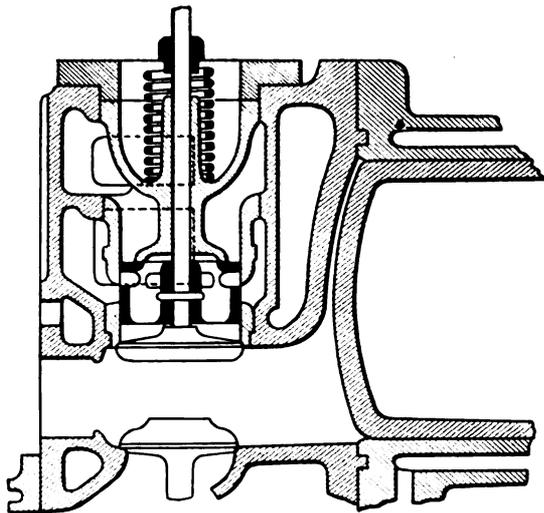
Combustion Chamber of Nürnberg Engine.
